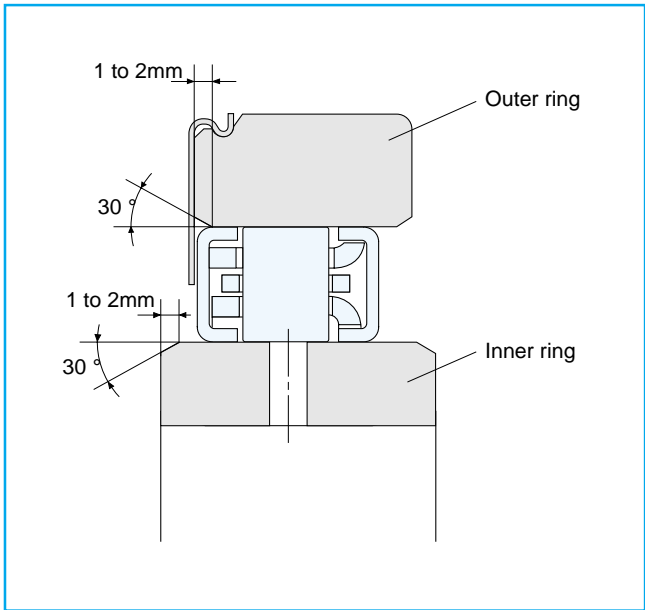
Chamfering Dimensions for Inner and Outer Rings
